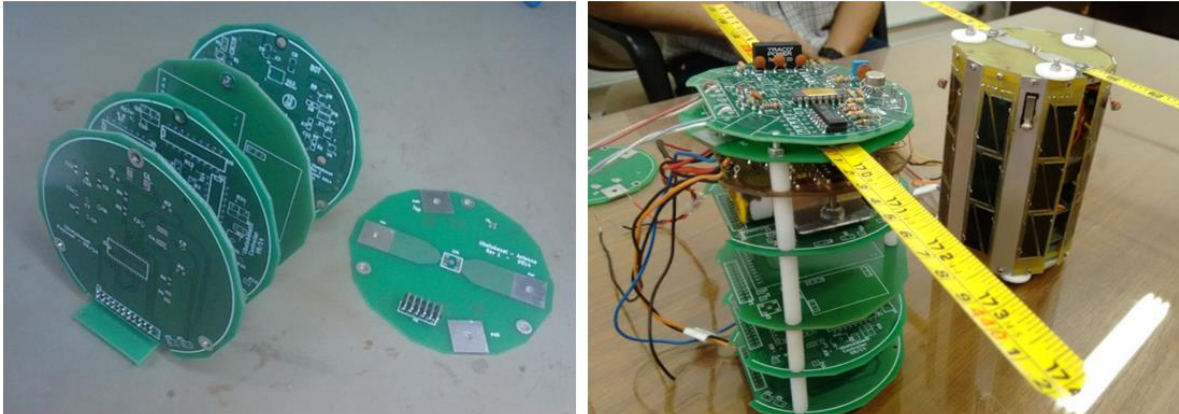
Engineering model of the new tubesat design with Langmuir probe payload.
